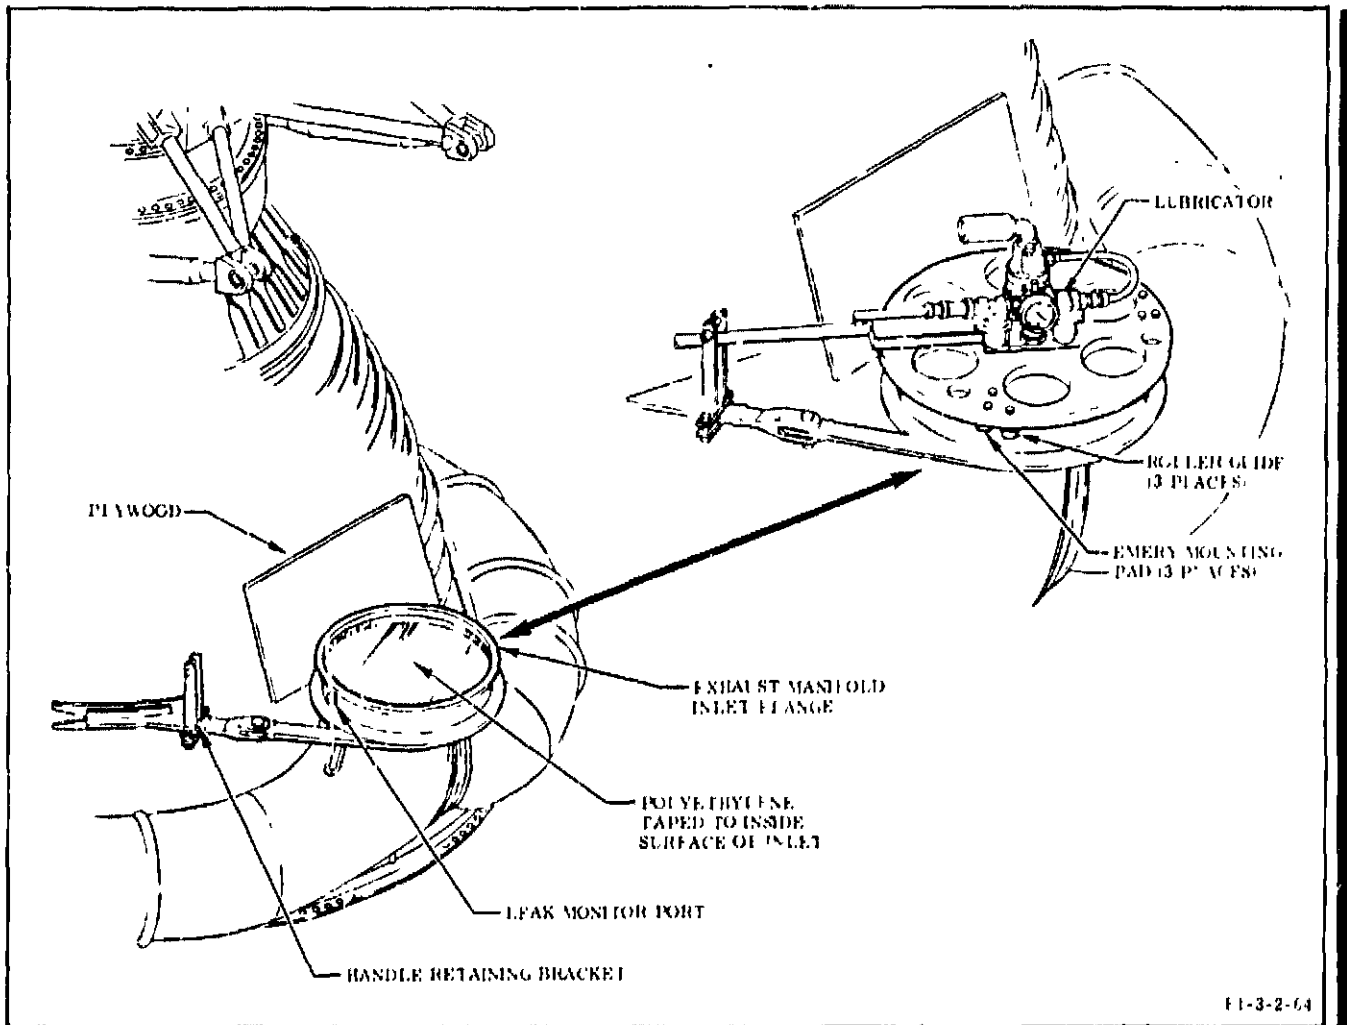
Reworking Thrust Chamber Exhaust Manifold Inlet Flange
